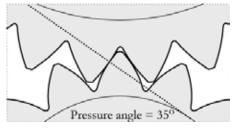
Gear tooth geometry of the evaluated spur gear sets. Table 1 – General design parameters of spur gear sets.
